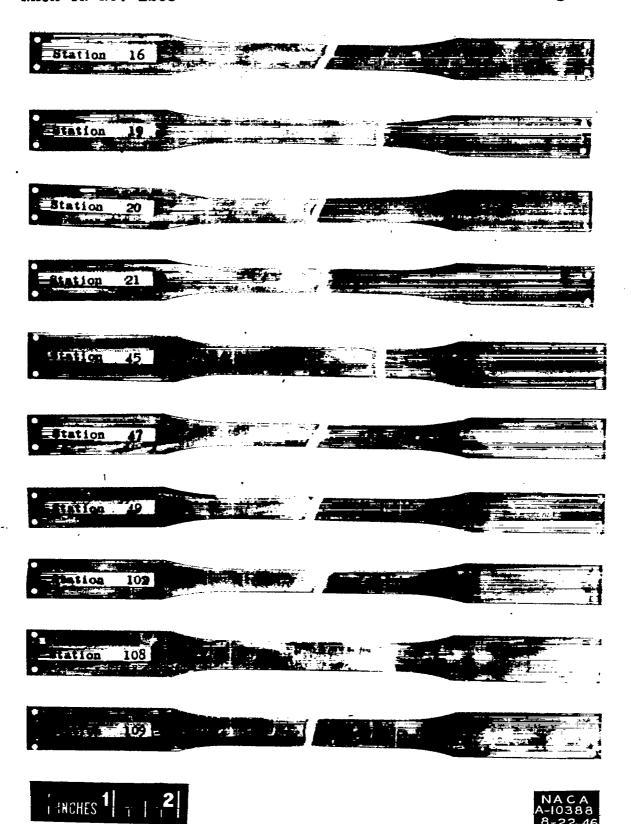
Alclad 248-T tensile specimens, taken from the baffle plate of the C-46 airplane wing thermal system, after fracture.
